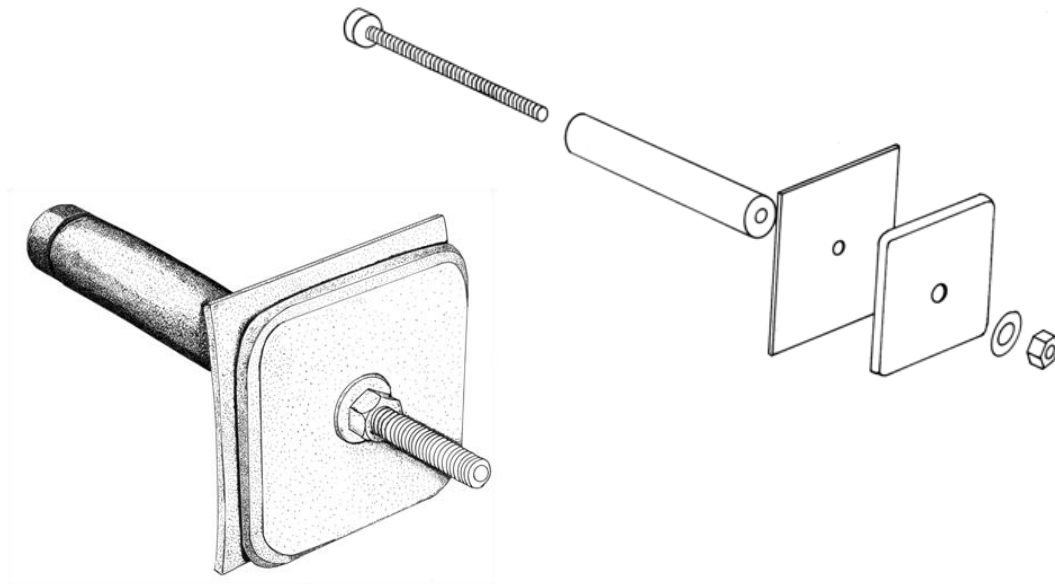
Illustration of the expansion bolt developed to temporarily hang the hull and ceiling plank. Illustration by P. Fix.
